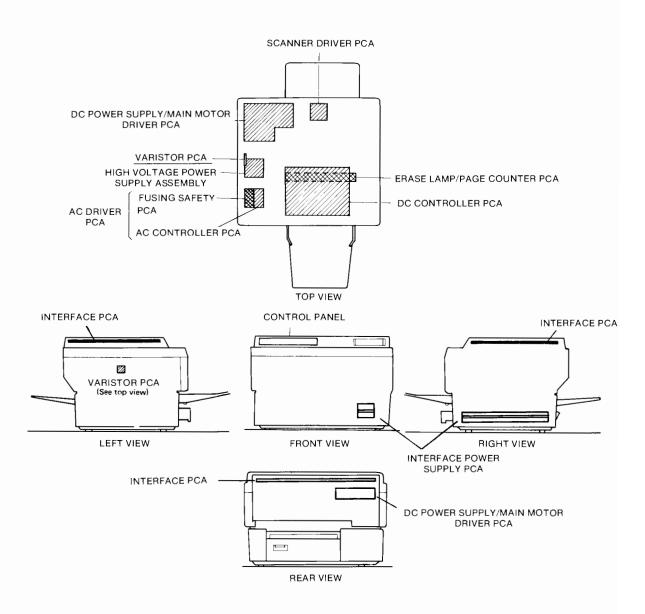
Electrical Component Layout HP 2686A (part 3 of 3)
